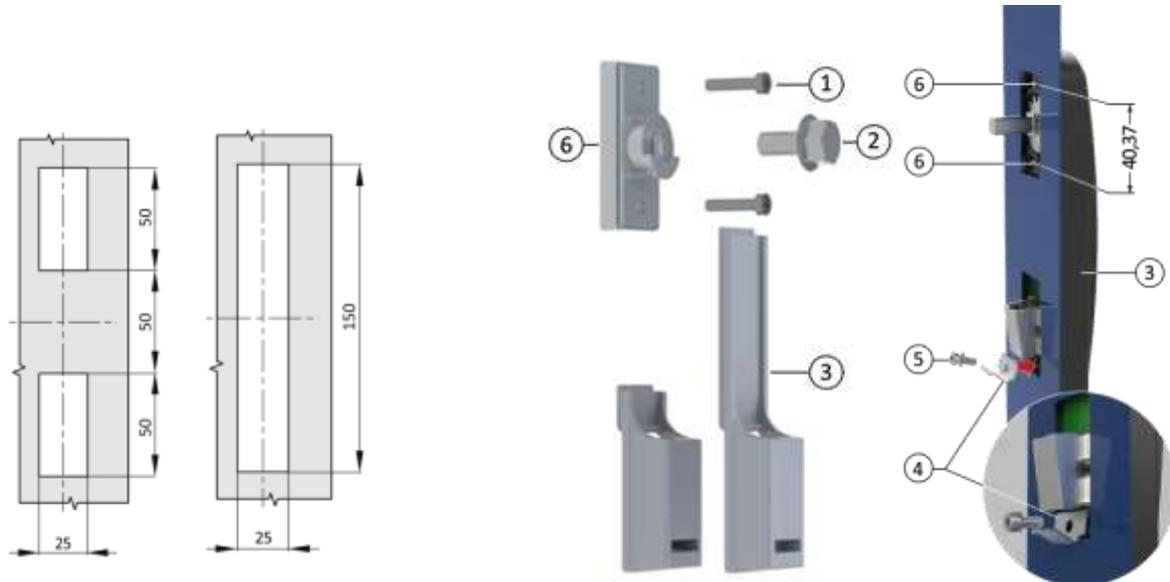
Stamp-outs in Cabinet door (short or long)    Figure 2: Installation and assembly of TANlock
